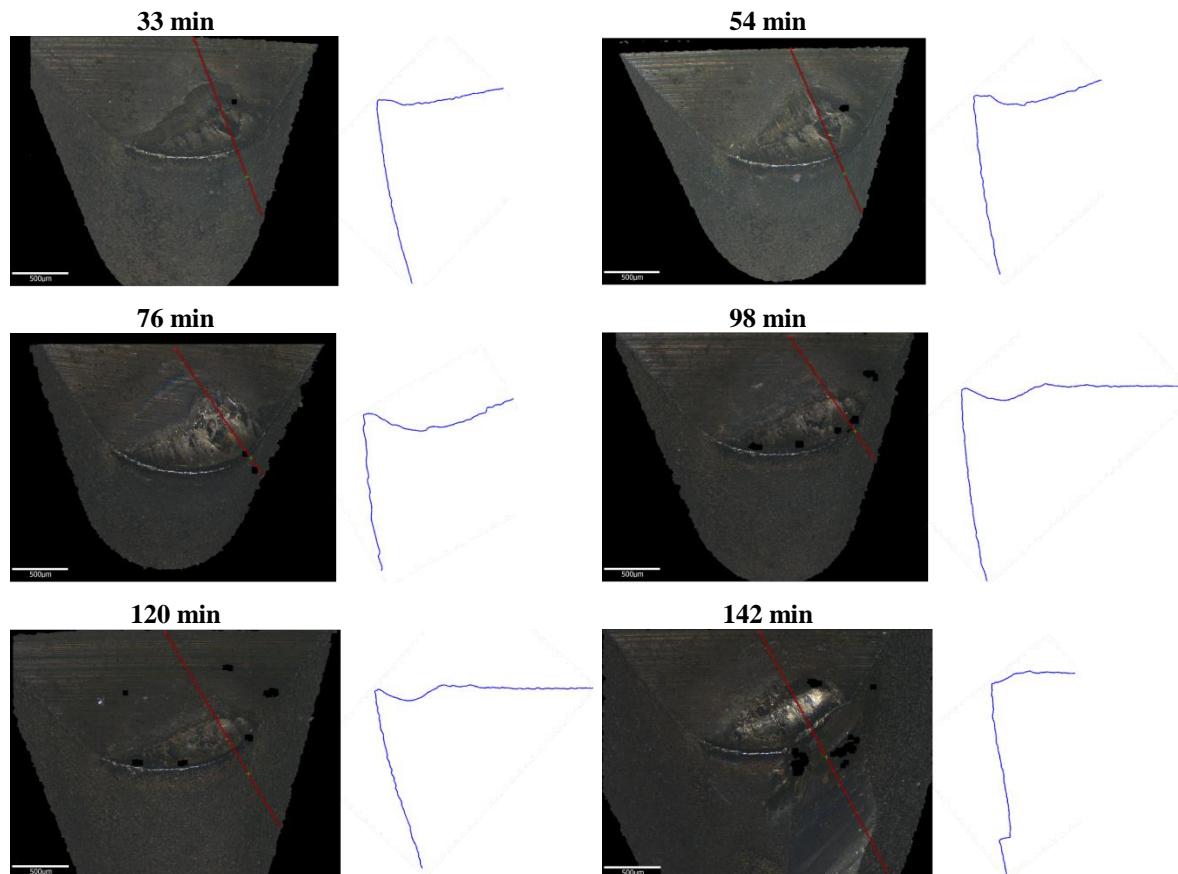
Attained tool wear as a function of machining time while machining CuZn21Si3P.
